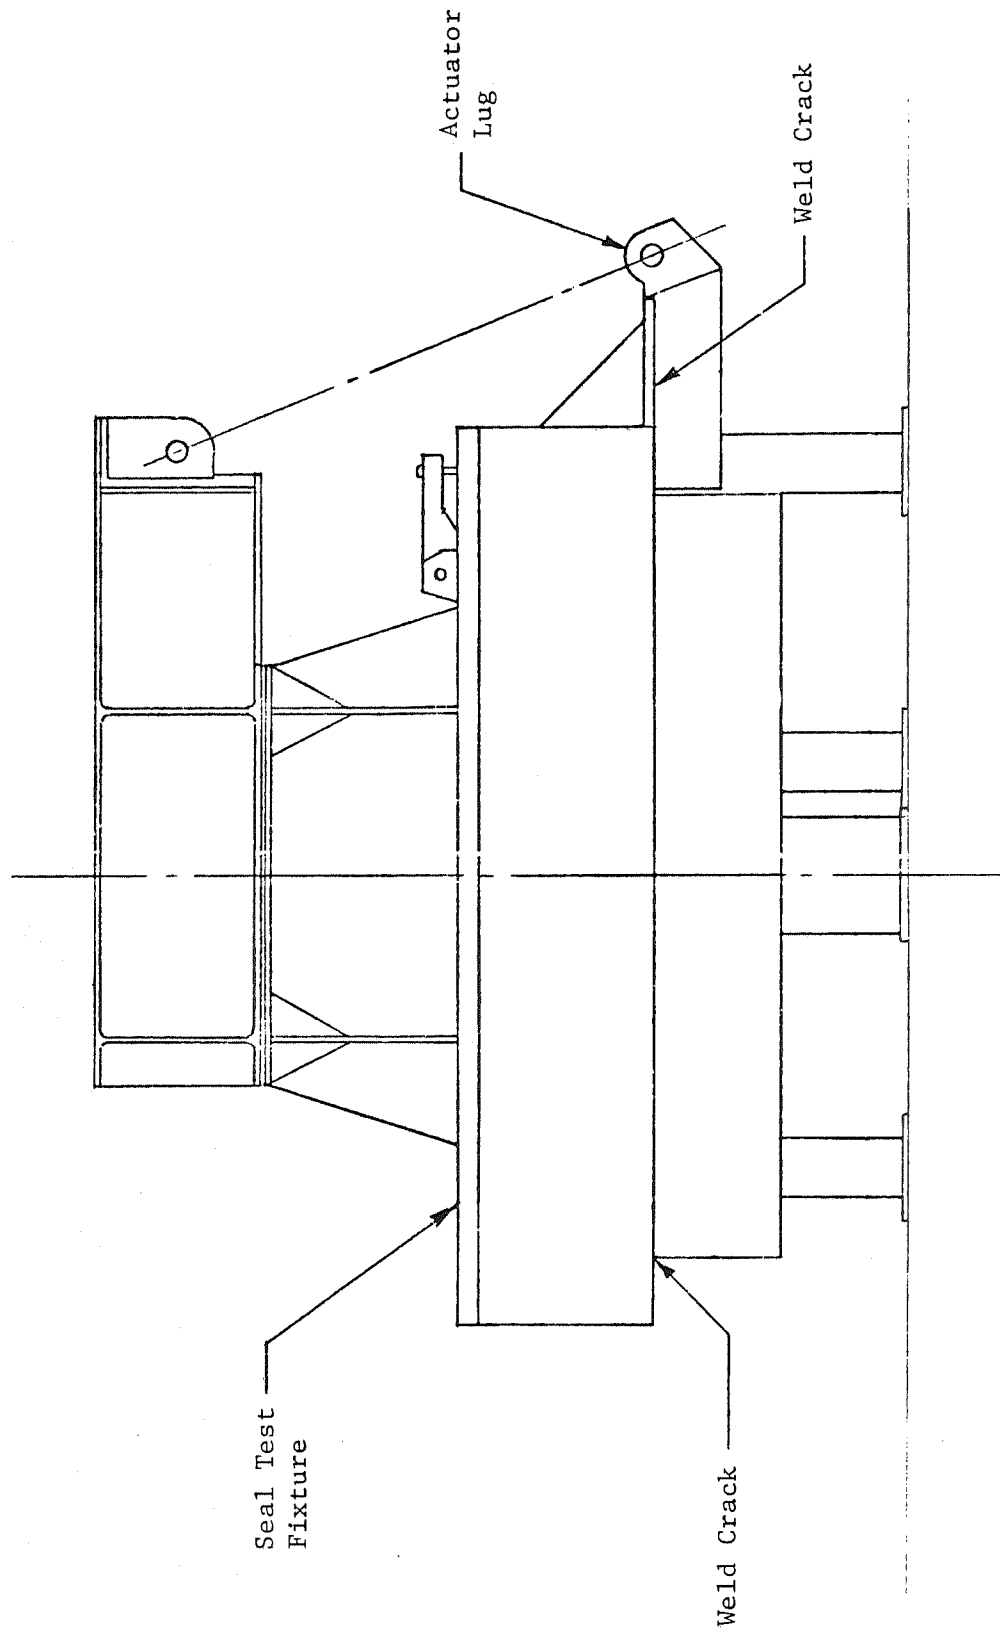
Location of Weld Cracks in Test Fixture
